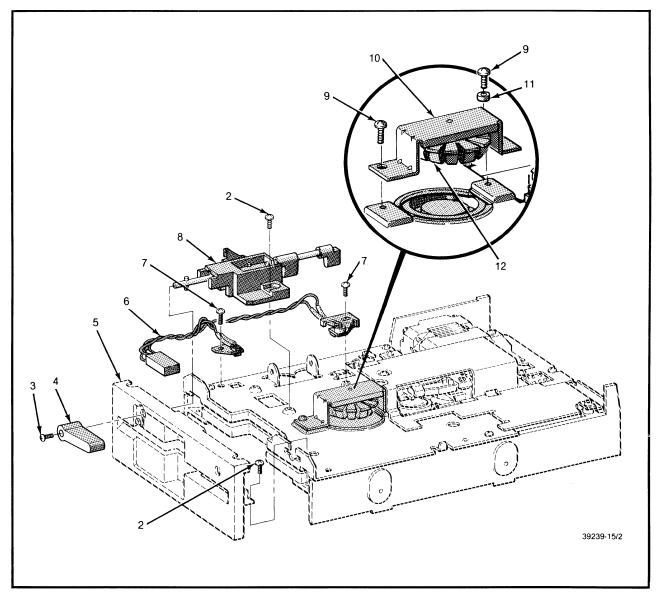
455/465 BASIC DRIVE ASSEMBLY (SHEET 2 OF 4)
